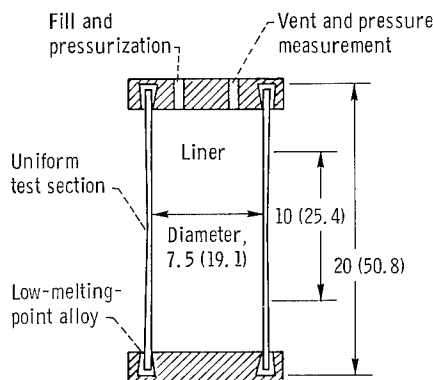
Schematic diagram of biaxial cylinder with removable end caps used for cyclic tests. (Dimensions are in inches (cm).)
